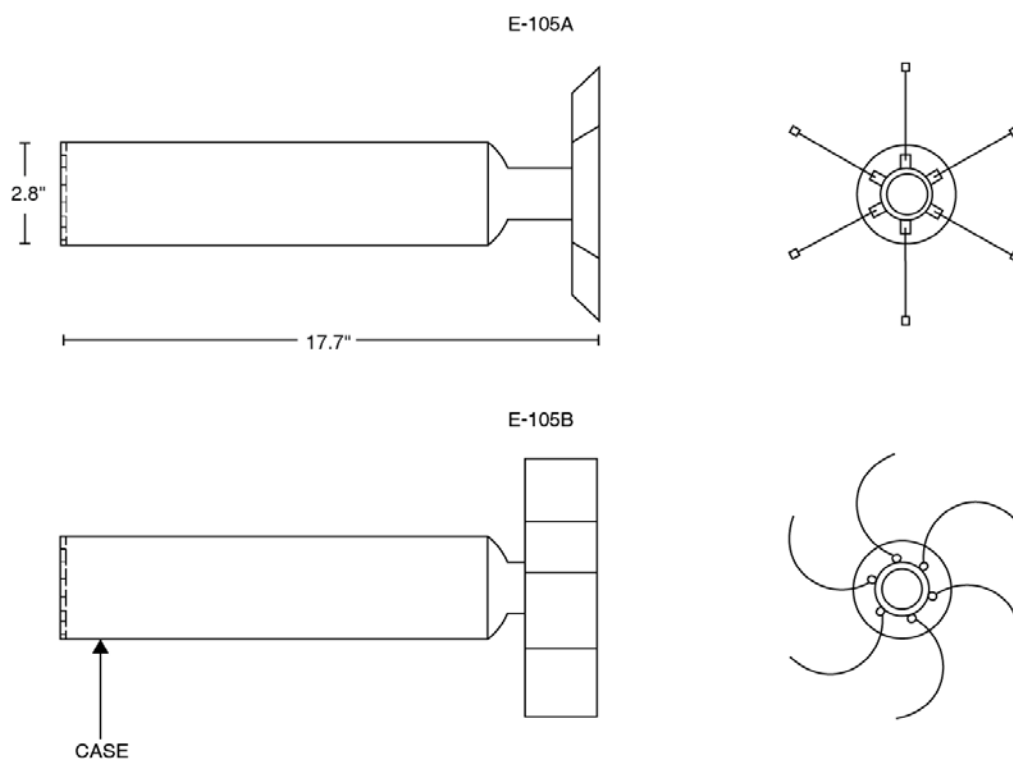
Bomblet, 6-pound, E105 - Line Drawing
